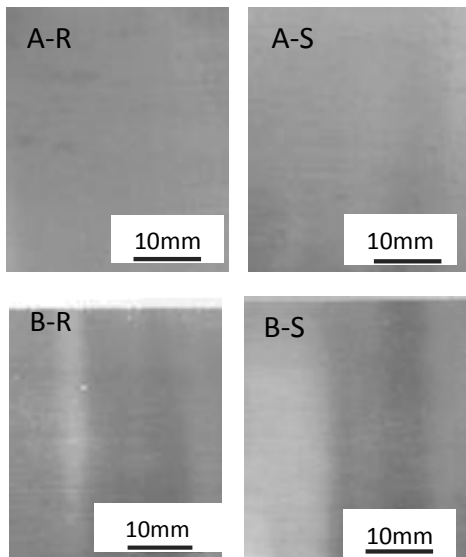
Cold rolled surfaces of as-cast strip cold rolled down to 1 mm. “A” and “B” indicate the scraper type. “R” is the roll contact surface, and “S” is the scribed surface
